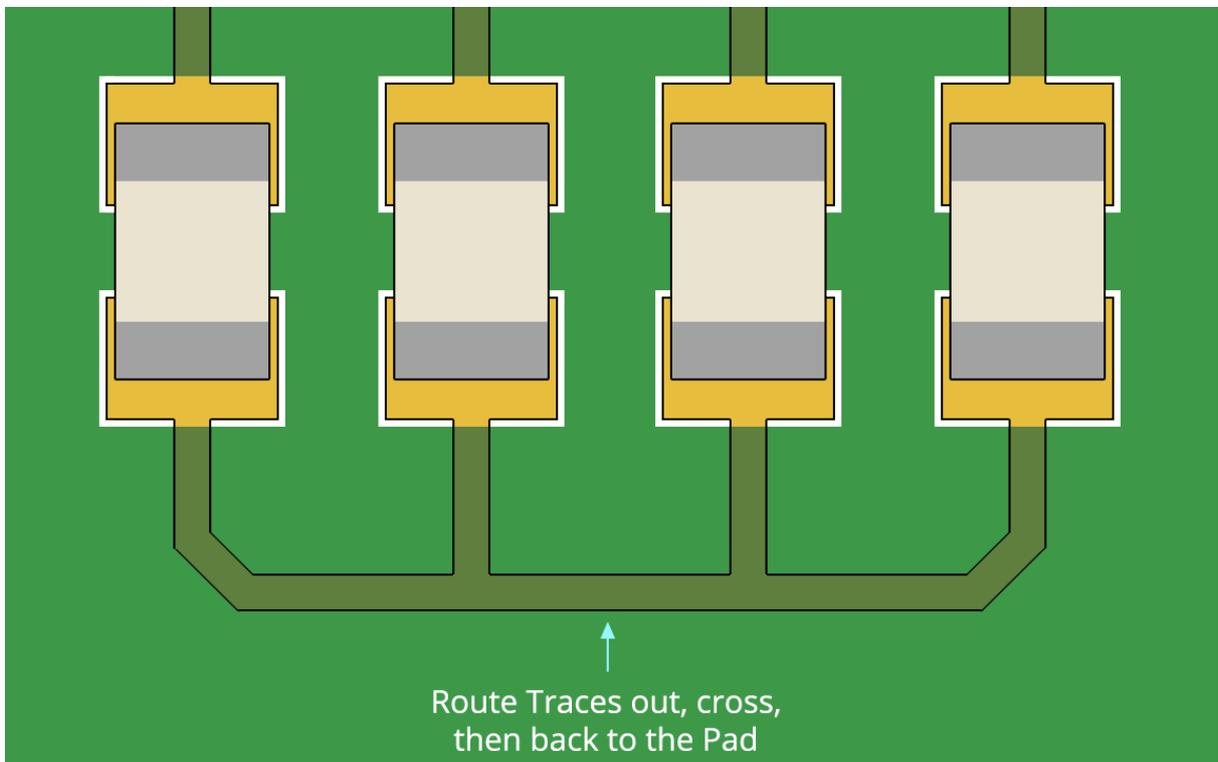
Connecting Pads of Closely Spaced Components (Good Design)
